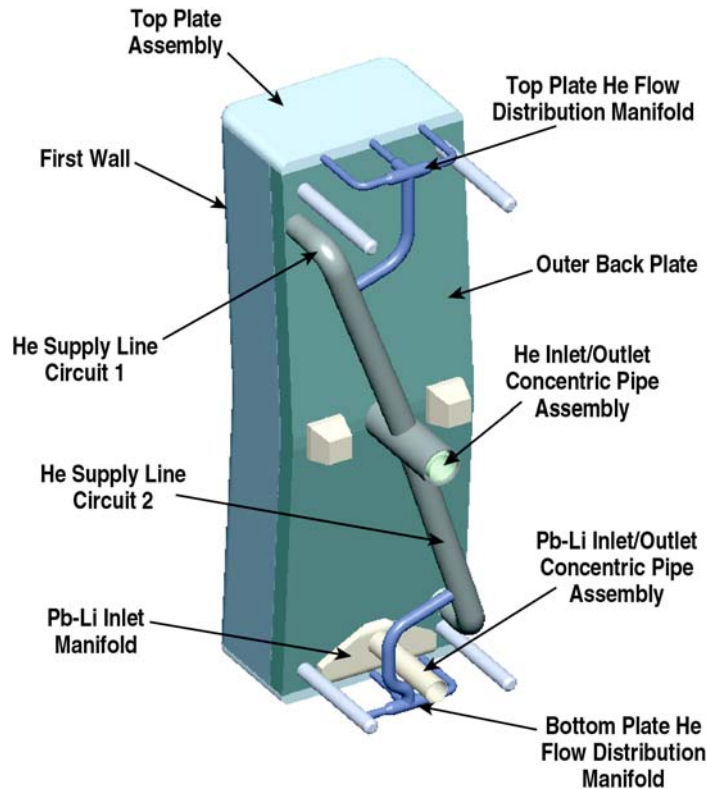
View of the He and Pb-17Li pipe assemblies on the back side of the TBM.
